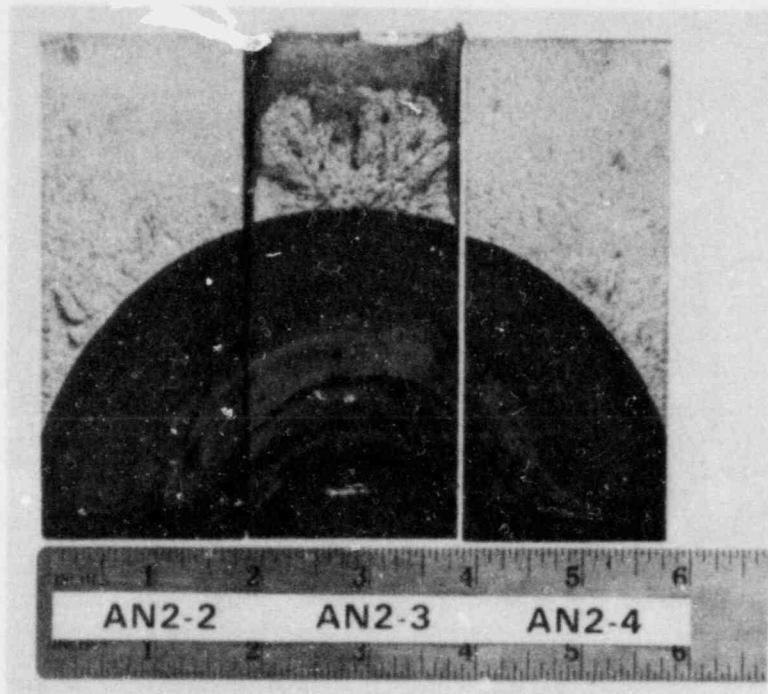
Lower Fracture Surface for Flaw A.
